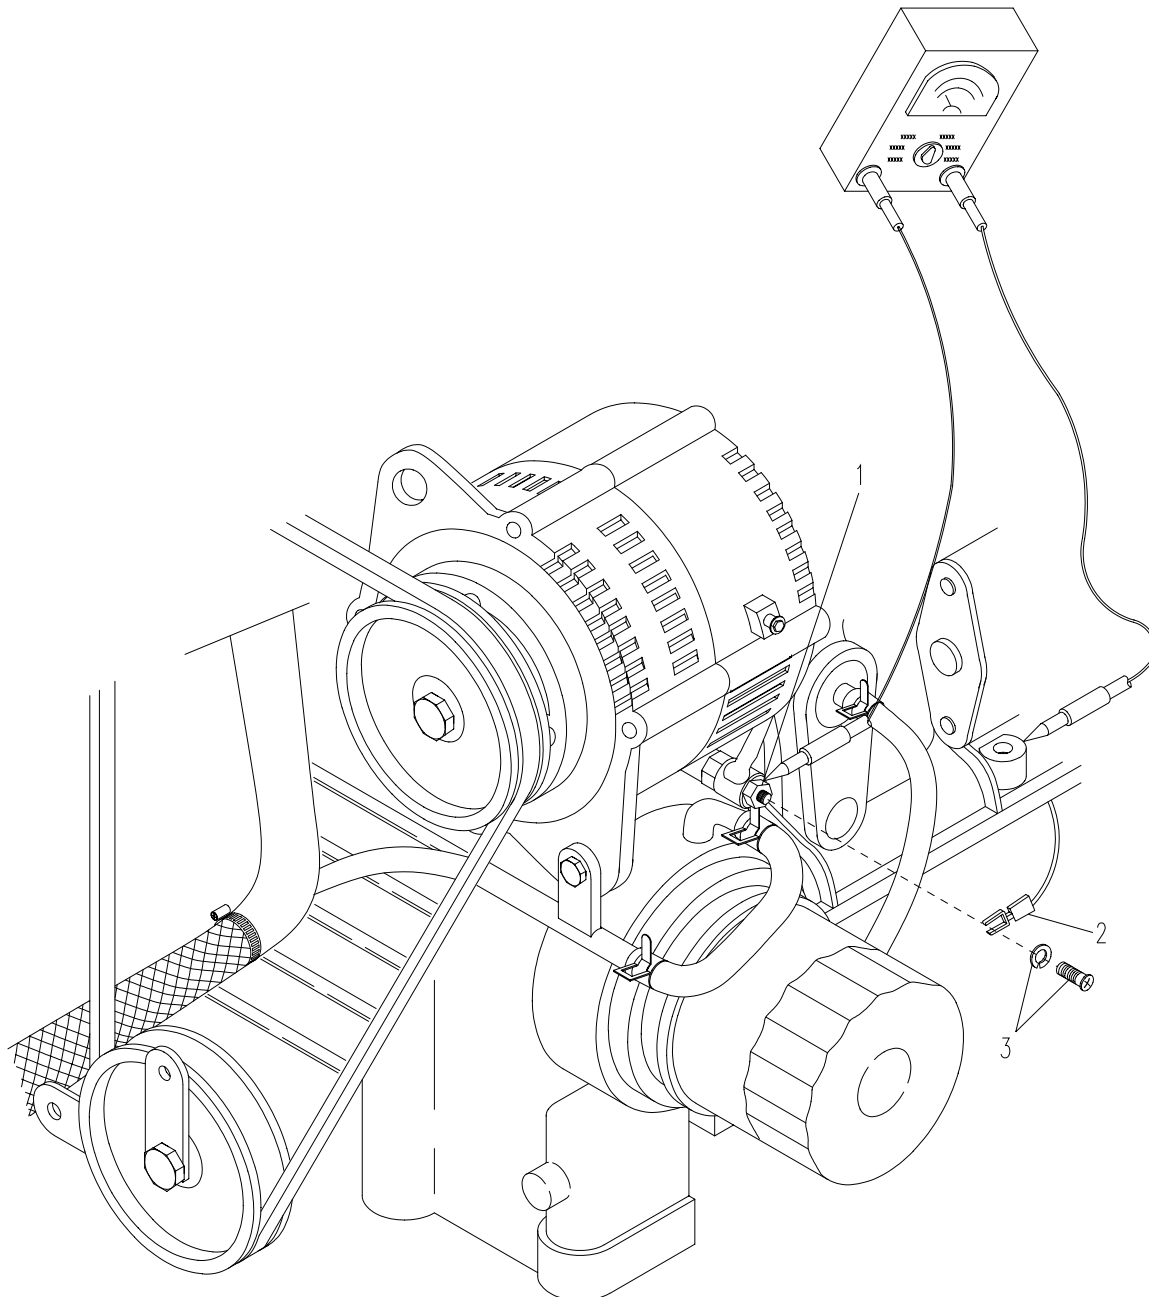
Low Oil Pressure Switch (Sheet 1 of 2)
